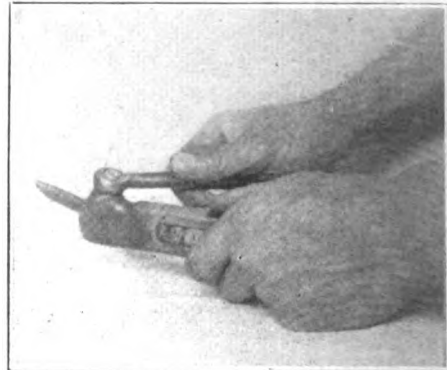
Improper Method of Clamping Tool Bit in Holder.
